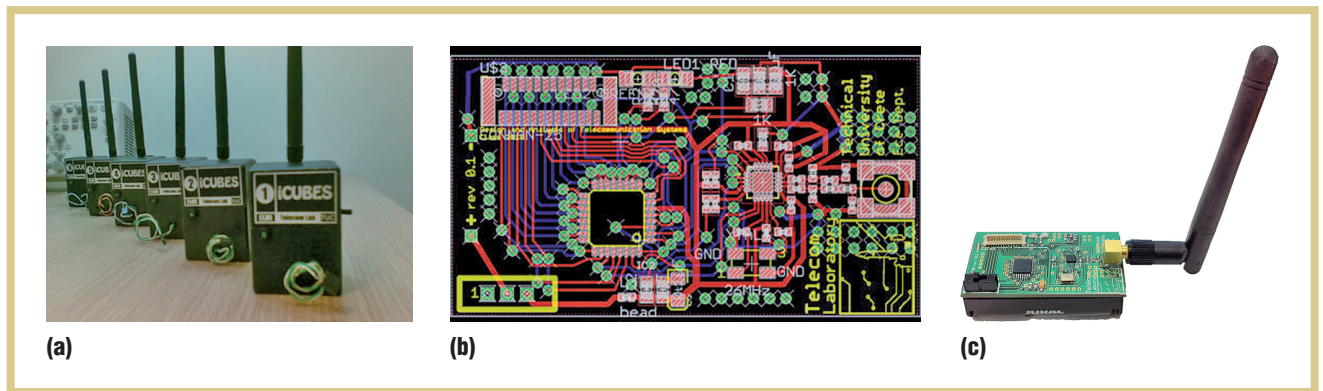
The packaging and printed circuit board (PCB) design developed in class: (a) external packaging for portable iCubes, (b) the PCB design of iCube v0.2, and (c) the assembled iCube v0.2.
